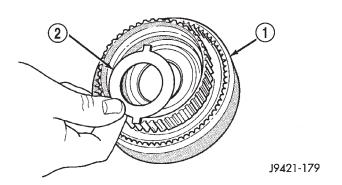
Positioning Thrust Plate On Front Annulus Support
